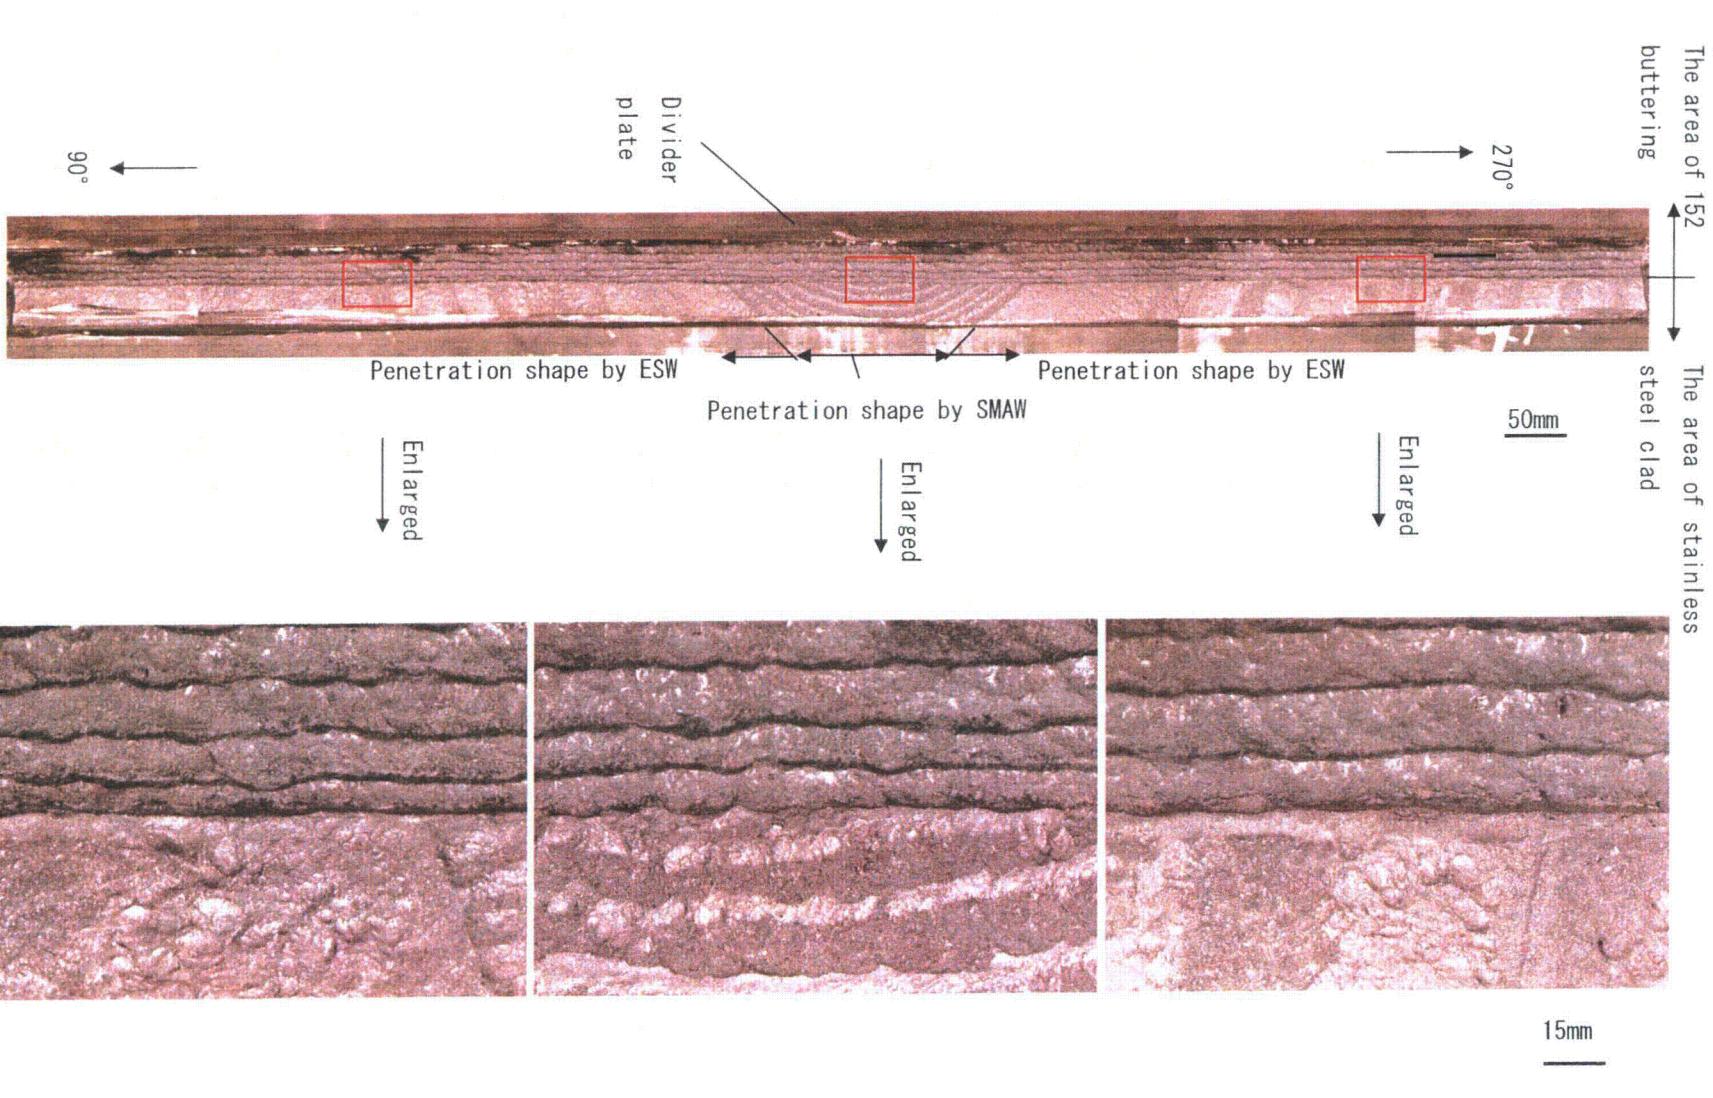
(2) Appearance of fracture surface of channel head body after removal of sample
